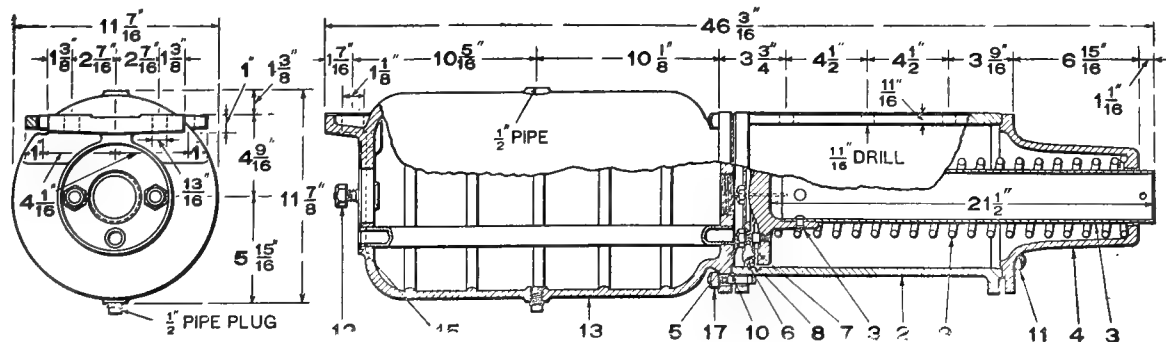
8 in. by 12 in. Freight Brake Cylinder and Auxiliary Reservoir Combined.
